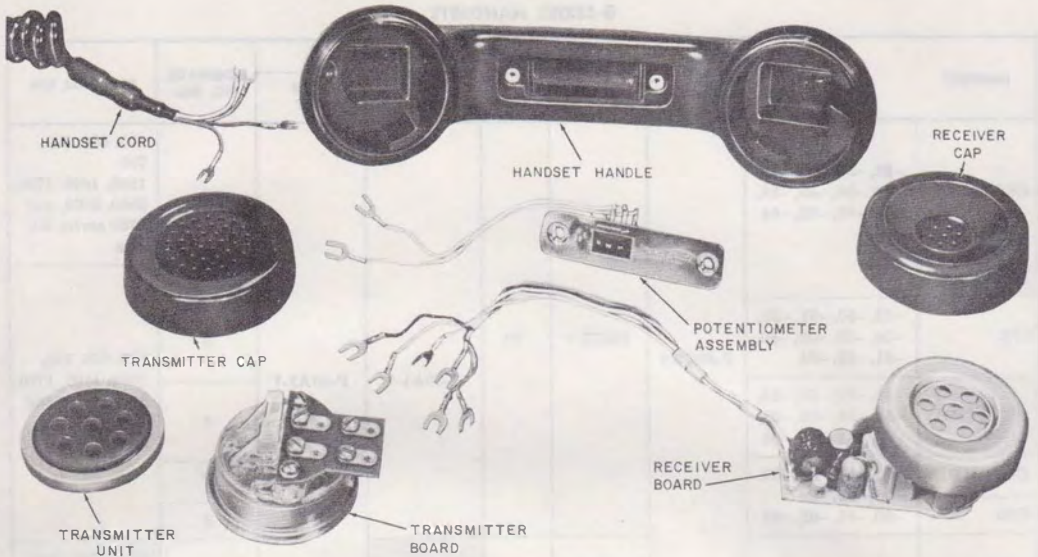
G6B Handset Assembly (G7B Handset is Arranged Similarly)
